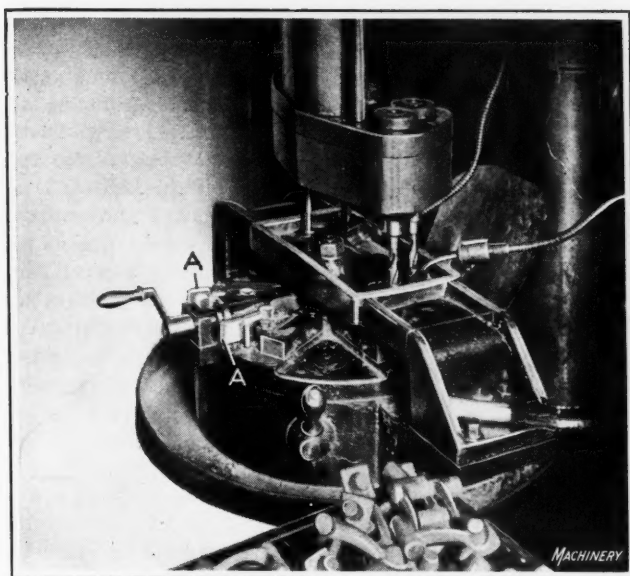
Drilling Machine equipped with Multiple Head and Indexing Fixture for drilling and reaming Valve Followers
